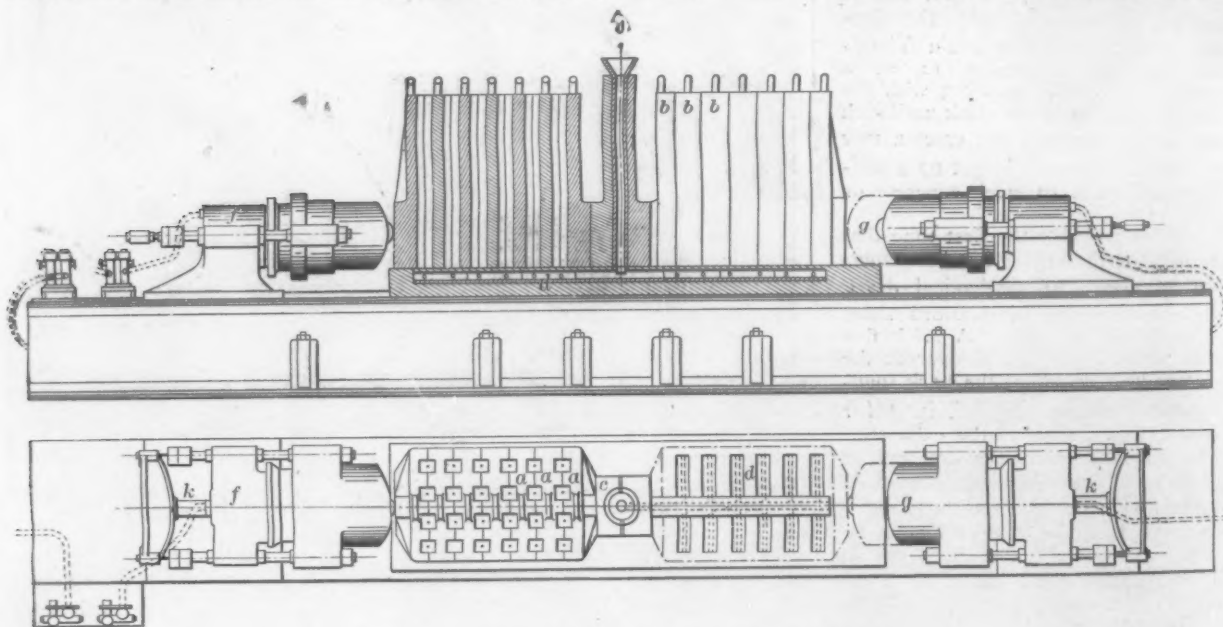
Defays-Lanser Method of Casting Small Steel Ingots
